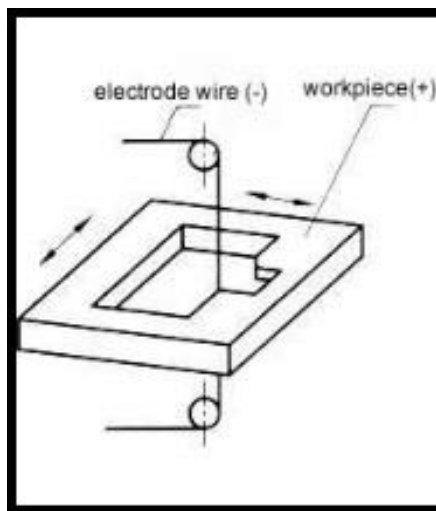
Cutting mechanism of electrode wire and workpiece
